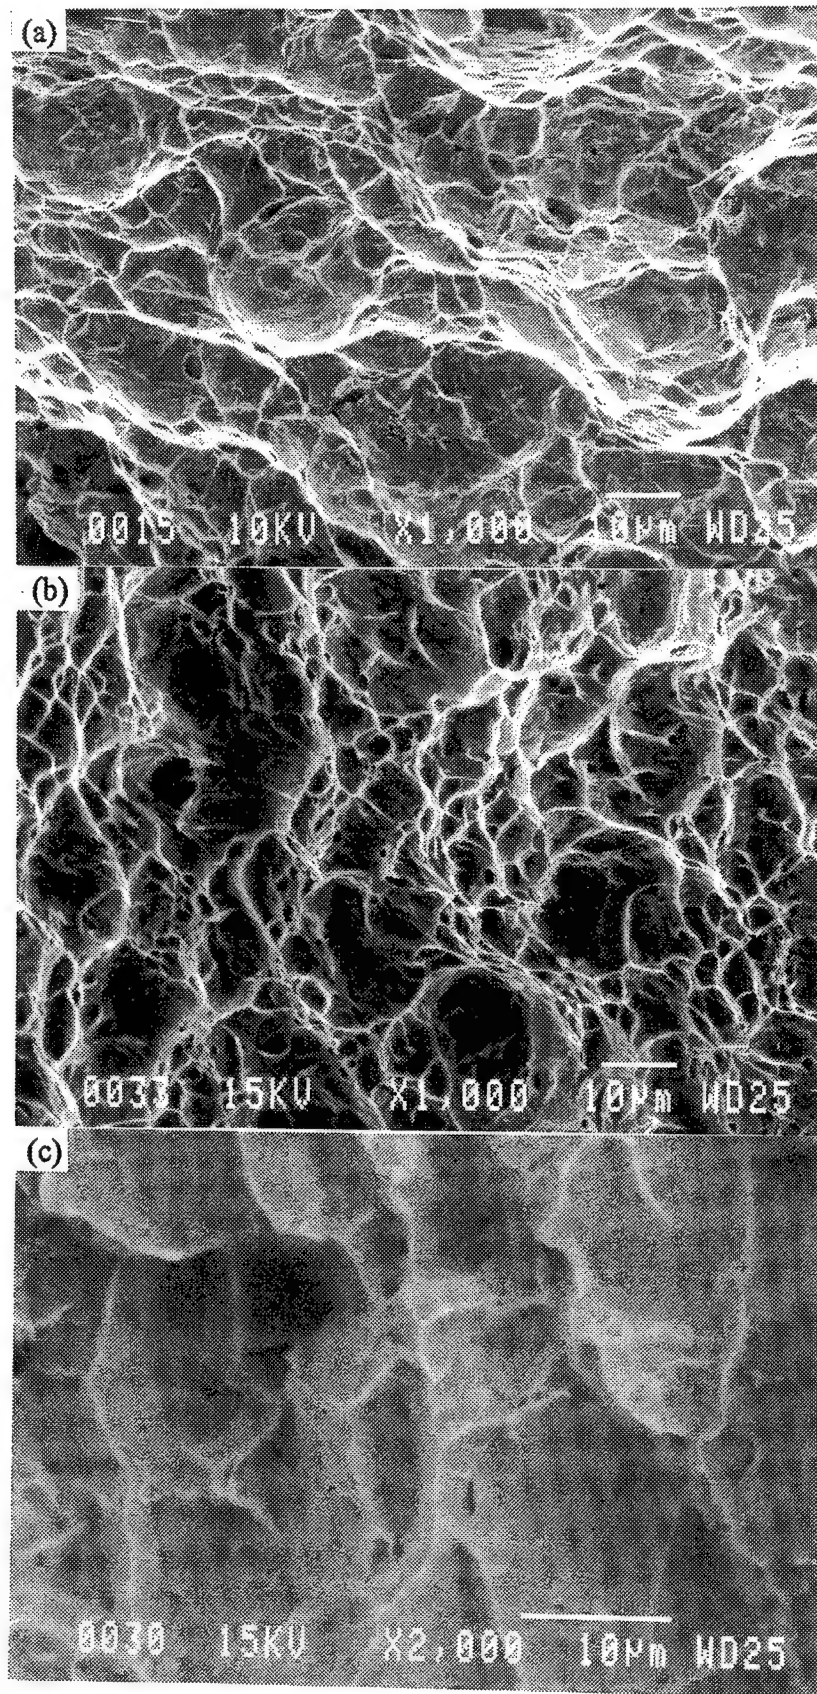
Fracture surfaces for smooth specimens (type A) pulled to failure in air. (a) Uncharged (b) Center of sample charged for 12 hours. (c) Edge of sample charged for twelve hours.
